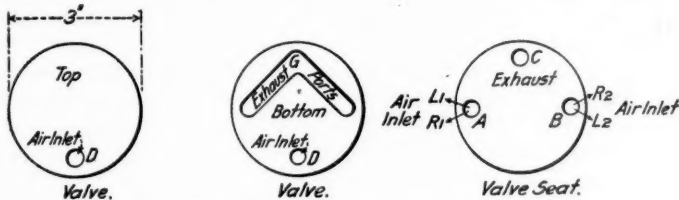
Arrangement of Valve and Valve Seat for Oscillating Cylinders.
